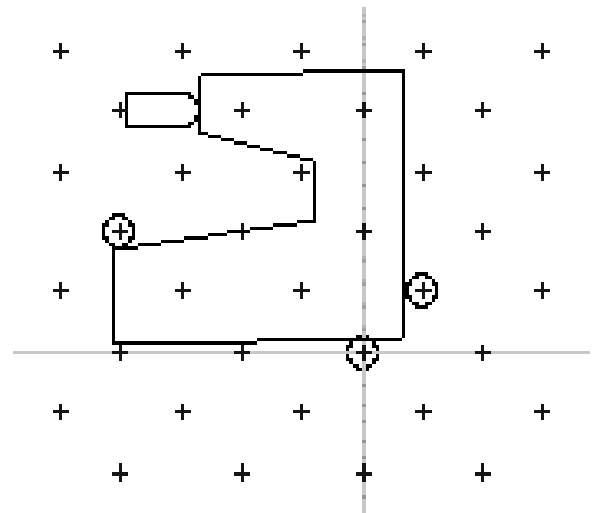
EXAMPLE OF A PART AND A MODULAR FIXTURE.
